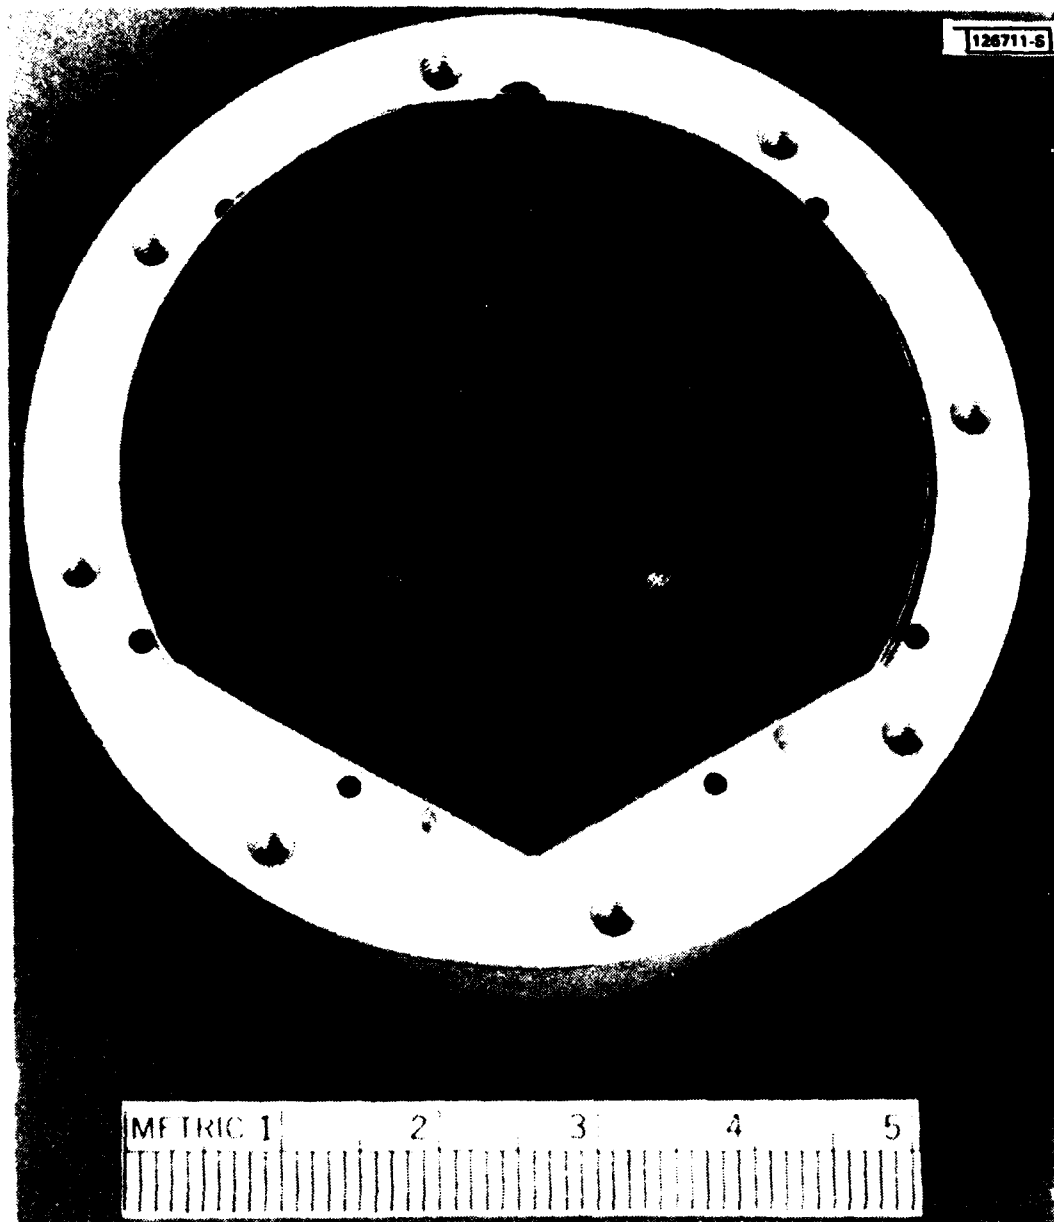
Photograph of a superconductive tapped delay line just prior to final assembly.
